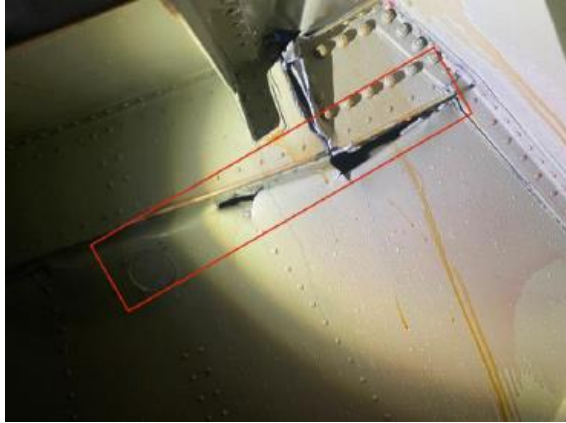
The channel (PANEL FT. SPREADER BAR SUPPORT, LH, PN: 13A01160-004) that houses the left float AFT attachment fitting cracked
